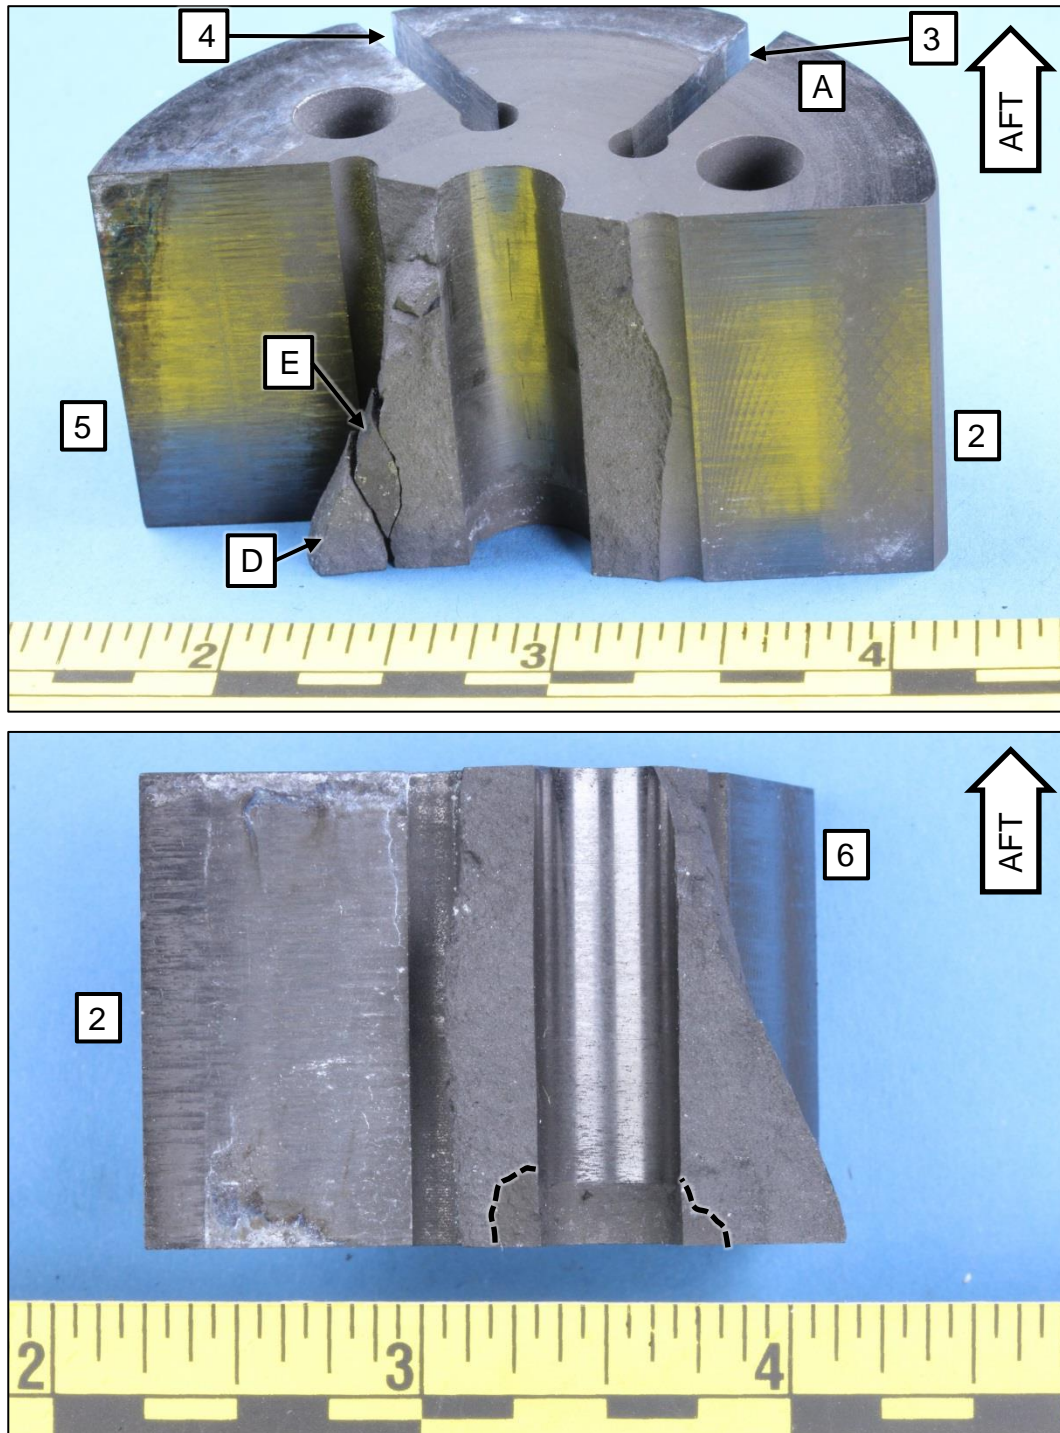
Views of the secondary fracture surfaces on pieces A, D, and E (upper image) and the mating side on piece B (lower image). Dashed lines in the lower image indicate areas that appeared darker relative to the rest of the fracture surface.
